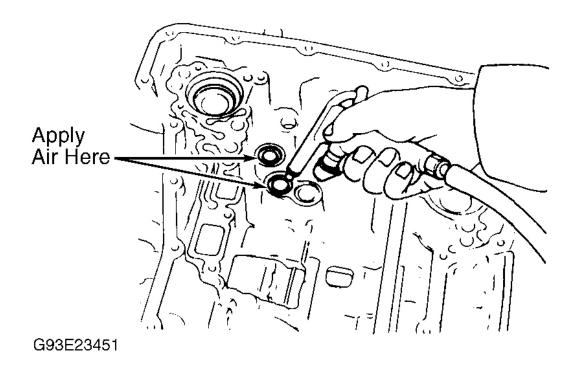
Checking Brake Band Operation Courtesy of NISSAN MOTOR CO., U. S. A.
